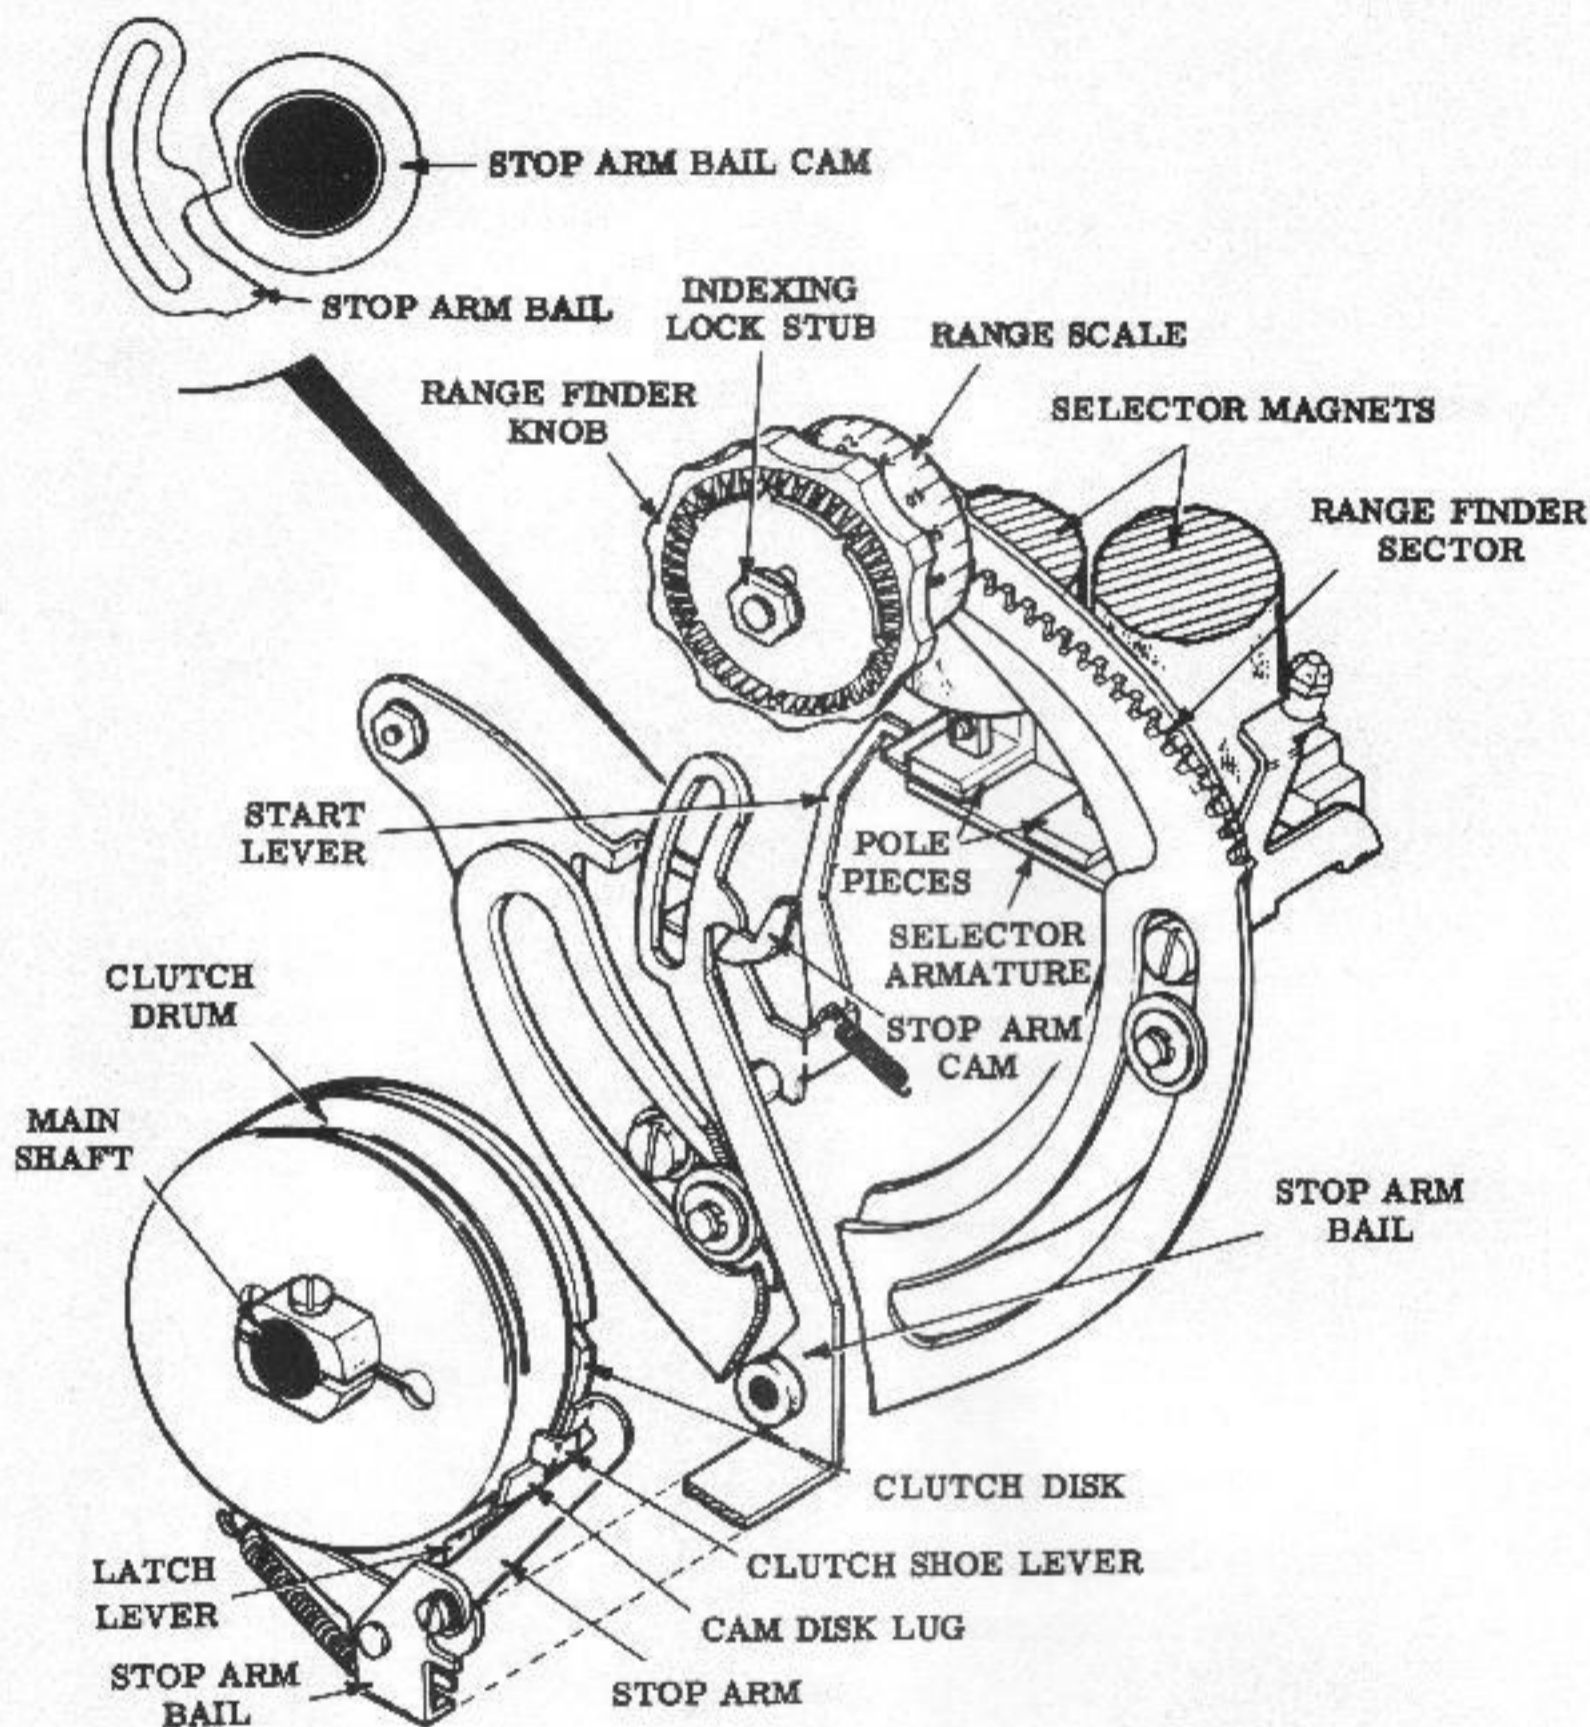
Range Finder and Selecting Cam-Clutch Assembly
